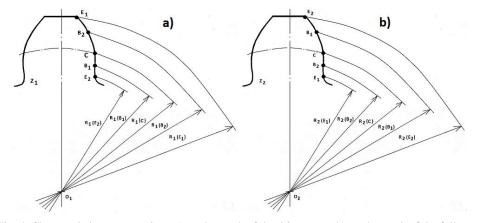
Characteristic contact points: a) on the tooth of the driver gear; b) on the tooth of the follower gear
